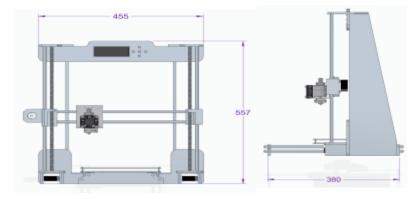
isometric view of 3-d printer Figure 2 Front View and side view of 3-d printer components Used model 1.Hot Bed
